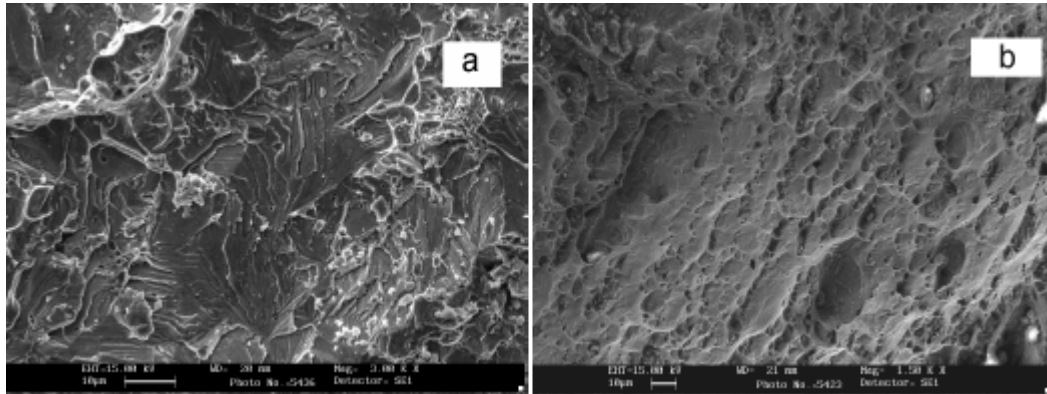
Brittle fracture in the intermetallic layer (a); ductile fracture in the fusion zone (b).
